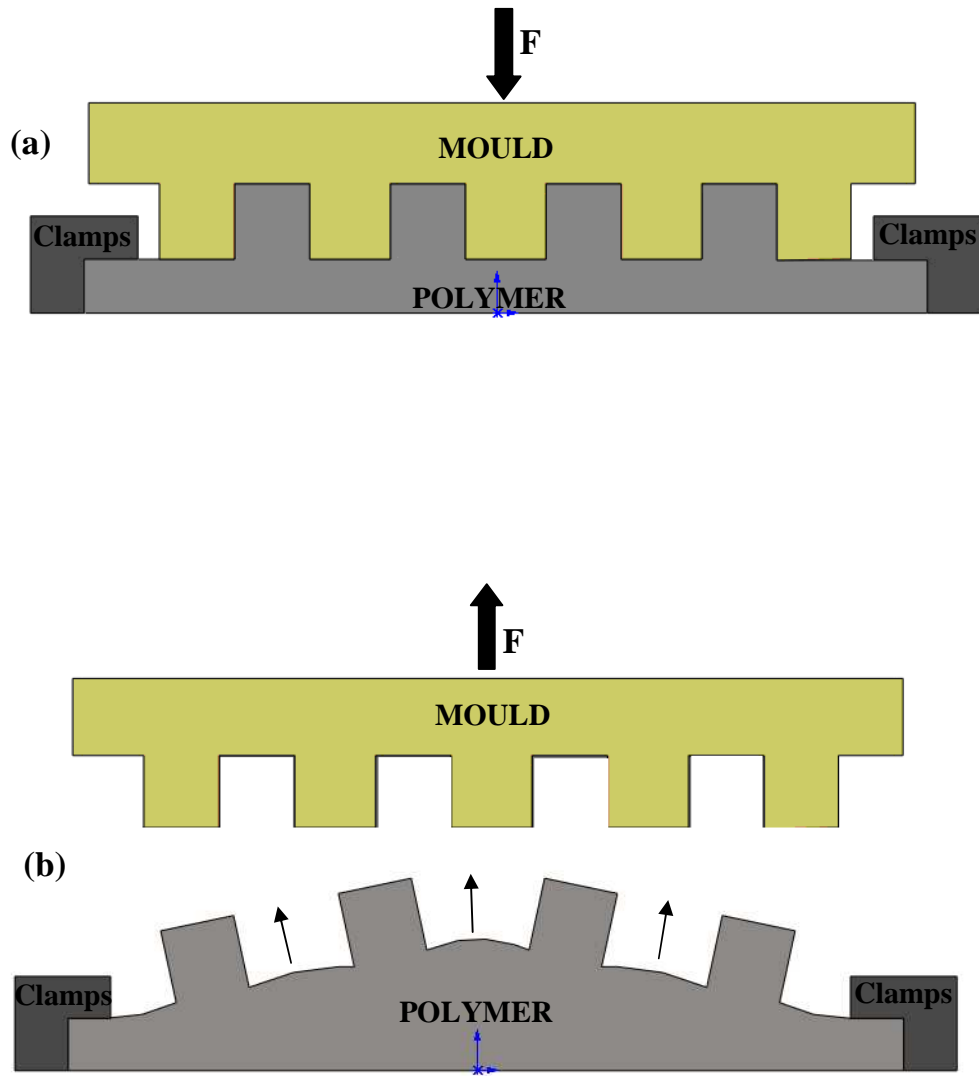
a) Moulding and b) demoulding by the clamping technique.
